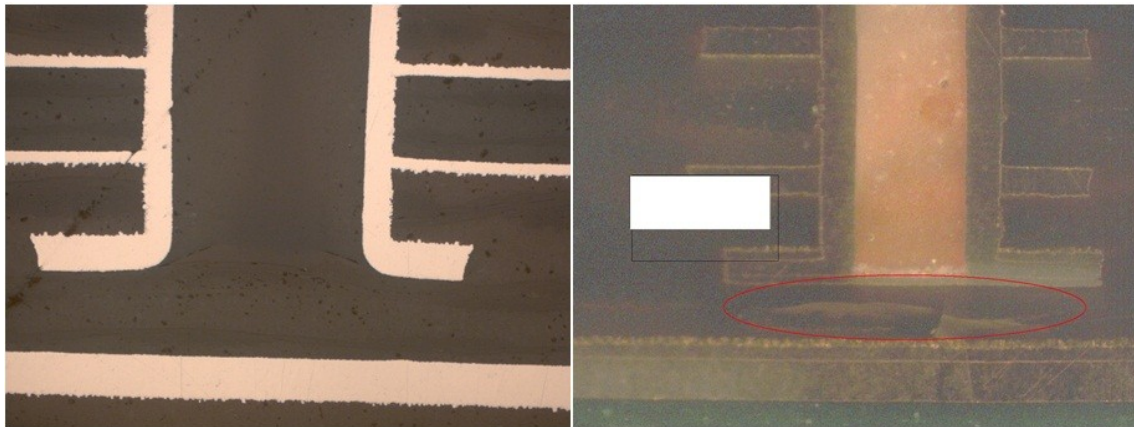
Eyebrow crack testing on a high layer count PCB with micro-vias. Left picture is a PCB built with TH material and passing this test after 6X. Right picture is a failure after 3X with a PCB built using the common Comp1 materials.
